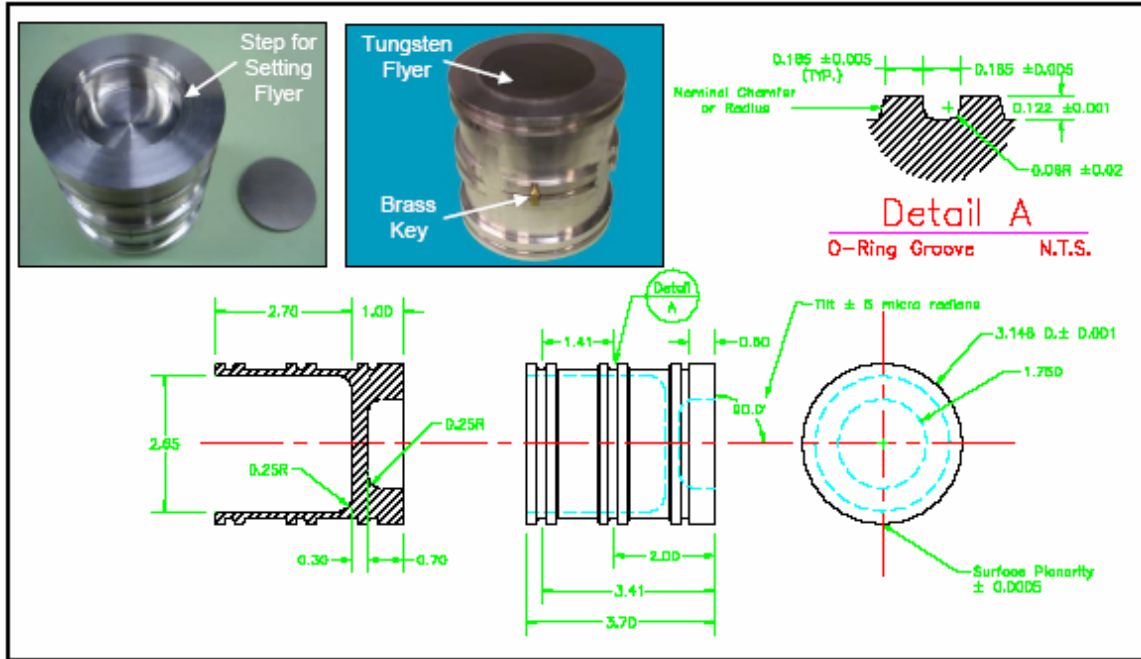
Schematic diagram of a high-speed aluminum projectile and final assembly used for EOS experiments.
